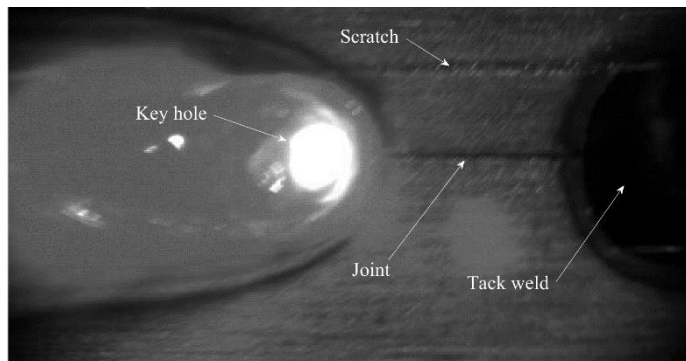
Image from the camera showing the key hole, joint, a scratch and also a tack weld.
